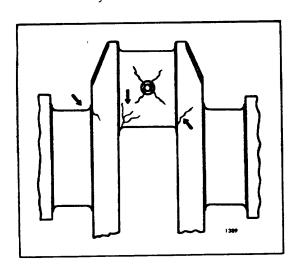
Crankshaft Fatigue Cracks
